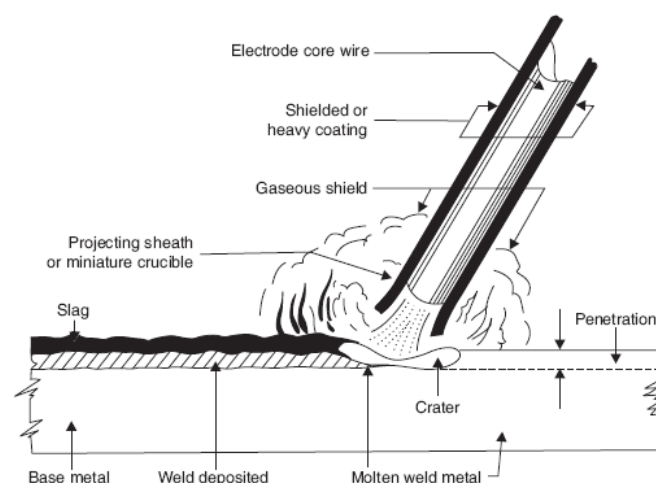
Schematic drawing of the Shielded Metal Arc Welding process (61)
